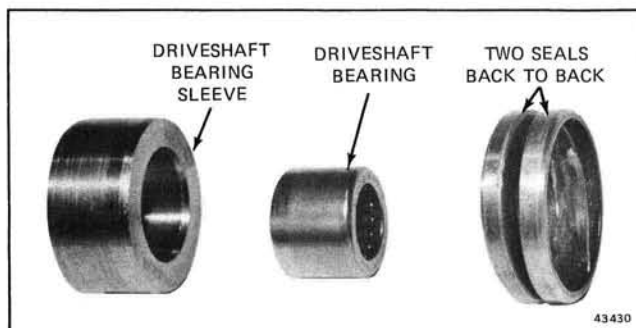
Driveshaft Upper Bearing Seals, Bearing and Sleeve
